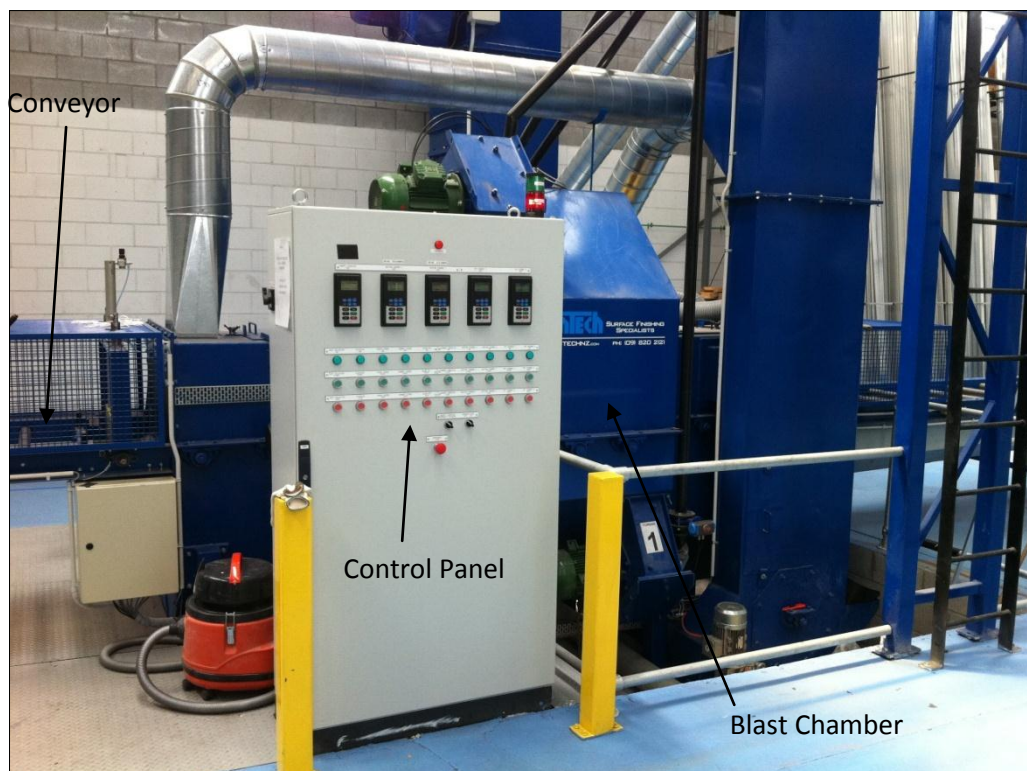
Abrasive blasting machine at Fletcher Aluminium
